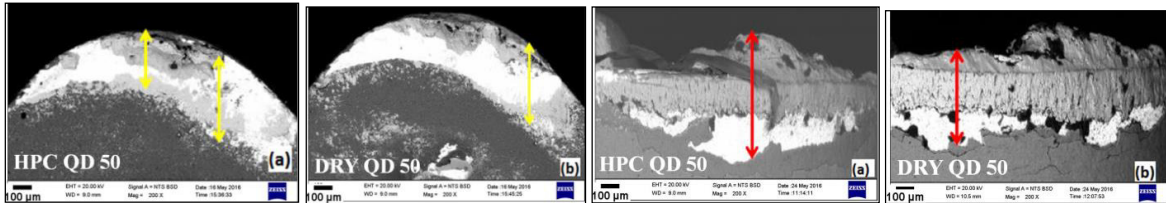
SEM images rake wear tool (a) HPC QD50; (b) DRY QD50. Fig. 7. SEM images flank wear tool (a) HPC QD50; (b) DRY QD50.
